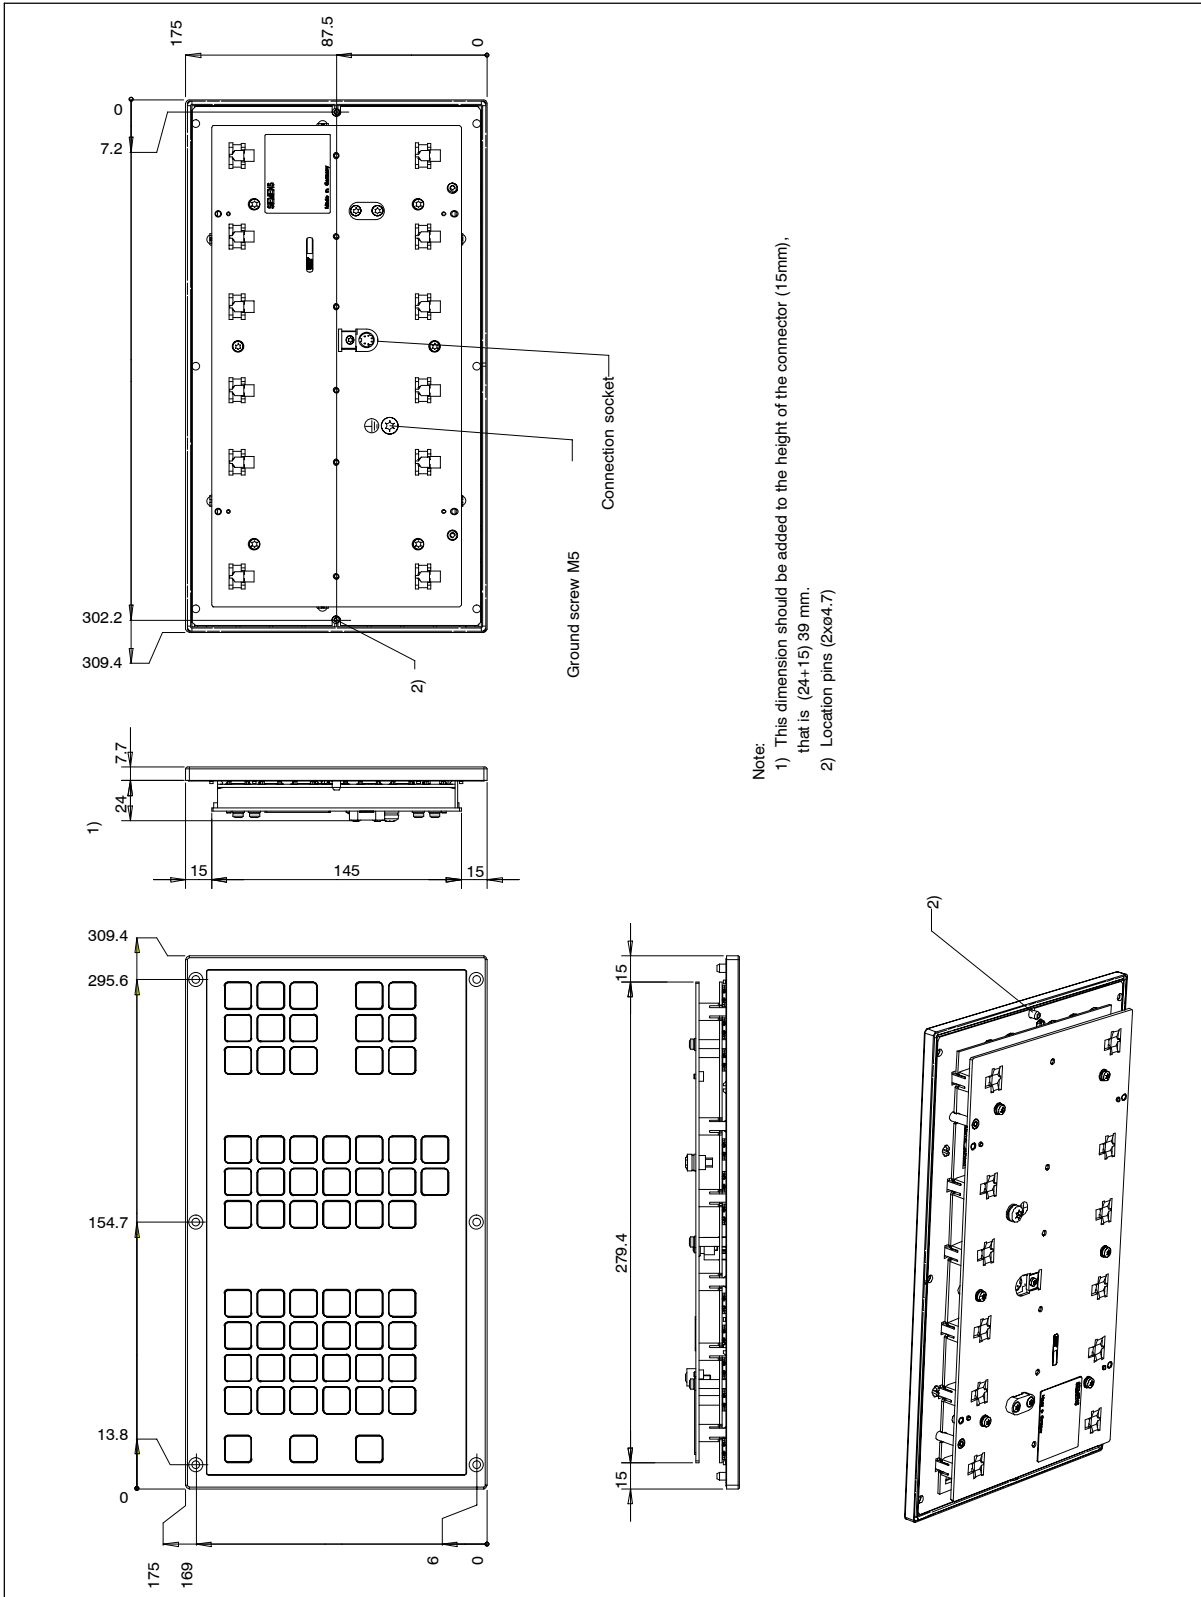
Mounting dimensions for the keyboard (horizontal layout for installation beneath the PCU)
